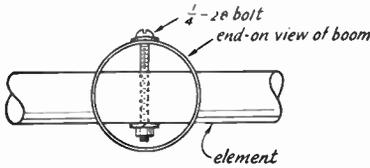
The center element section is held in the boom with a 1/4-28 machine screw, nut and lock washer. The guy wire attaches to the head of the bolt.
